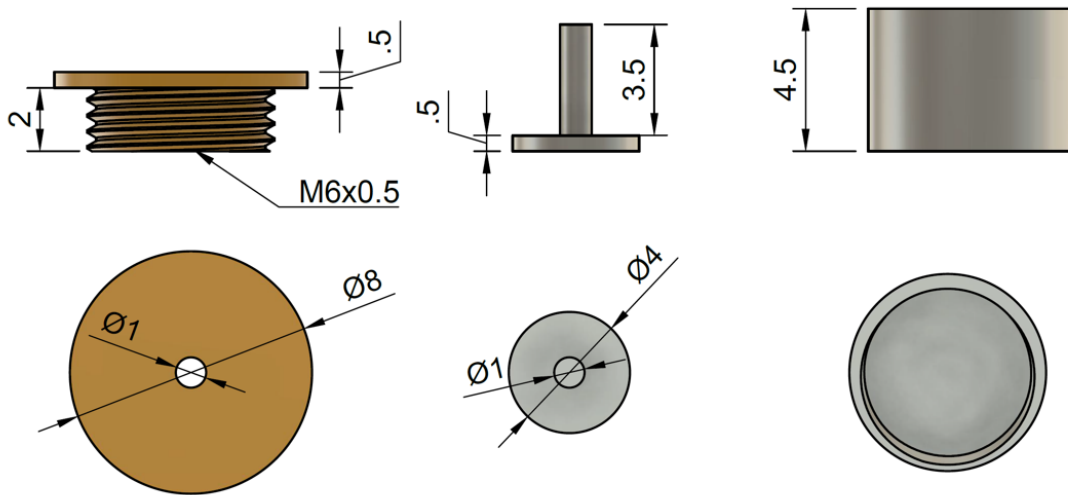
CAD Drawing of STA-Cell: In-house developed CAD drawing of a cell that could be mounted onto a STA sample carrier.
